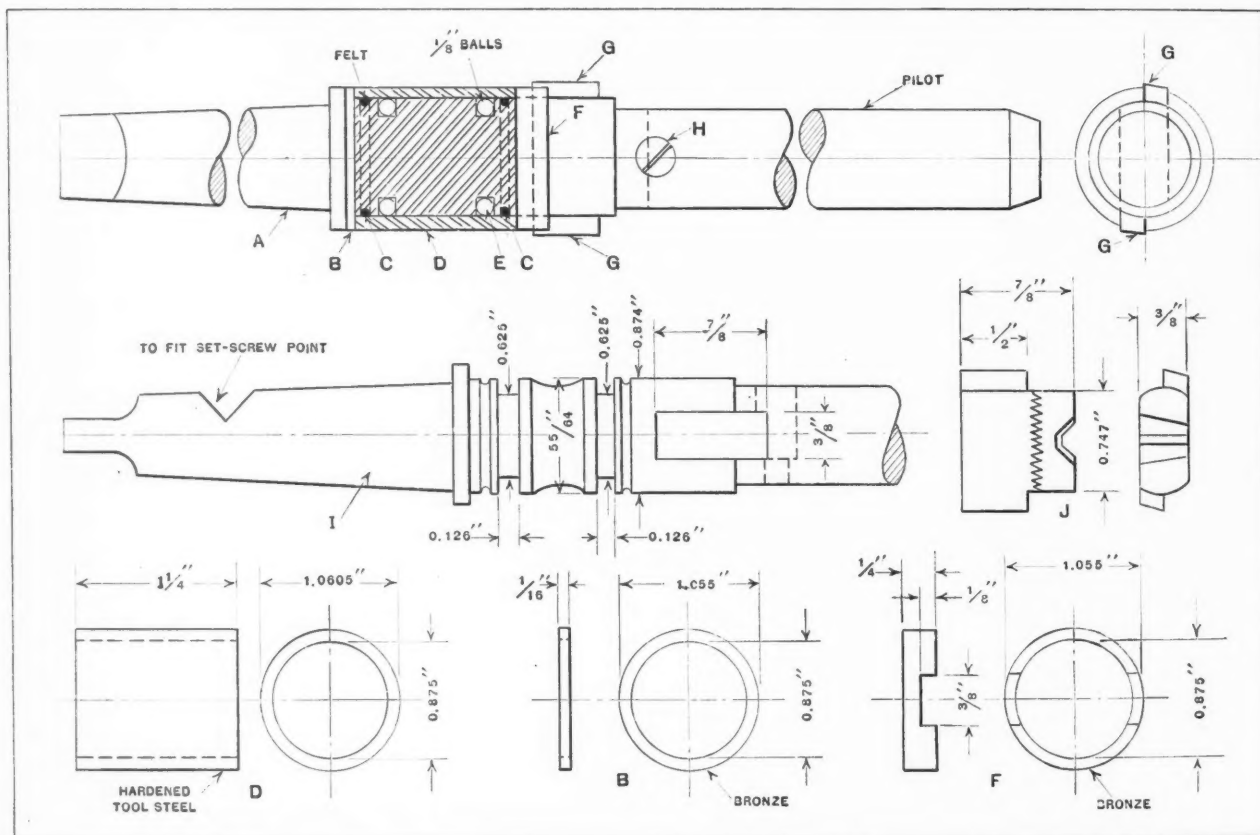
Assembly and Detail Views of Piloted Ball-bearing Boring-bar Using Adjustable Tungsten-carbide Tools
